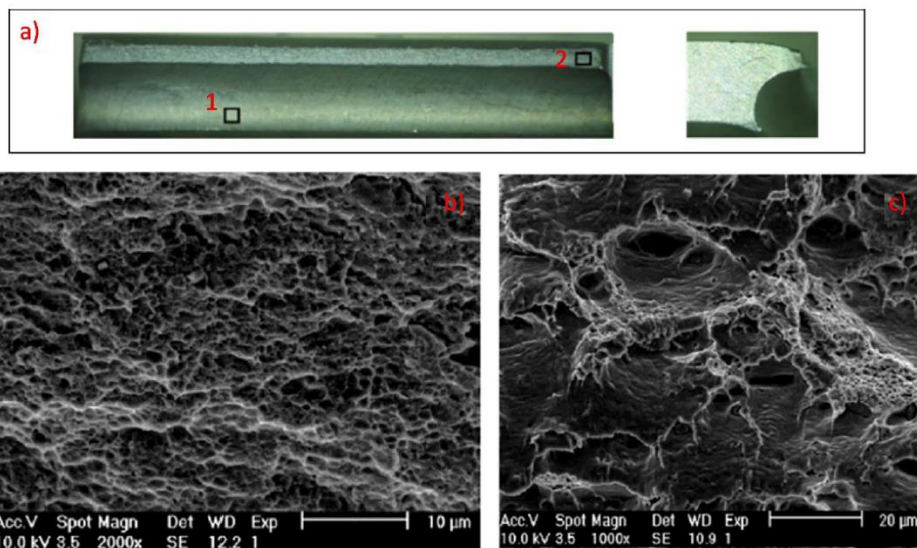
Fracture surface of a LTT5-4 fatigue specimen ( $\Delta\sigma = 160$  MPa): a) Macrograph of the fracture; b) Fractography of zone 1; c) Fractography of zone 2.
